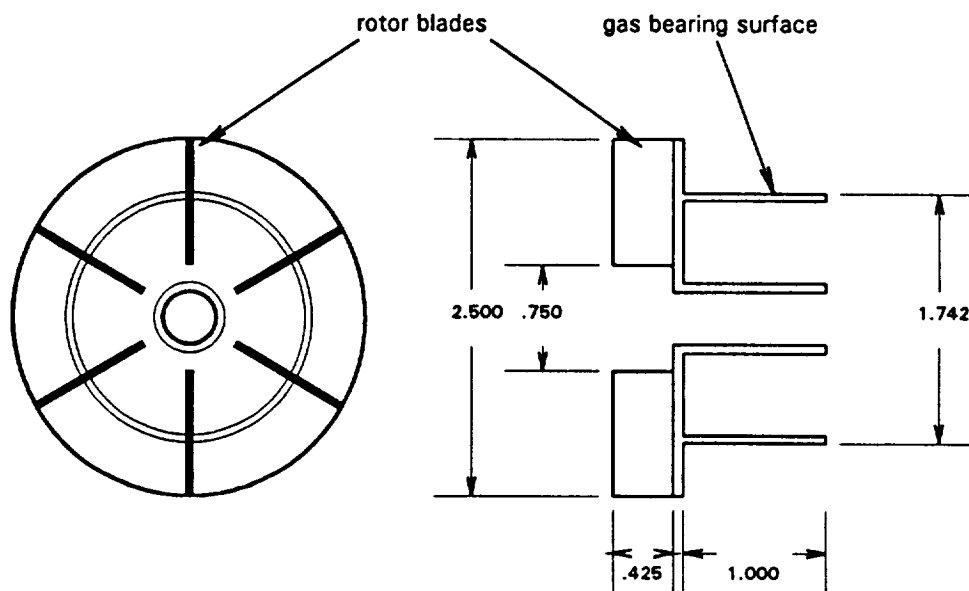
Centrifugal rotor for the gas circulation blower.
